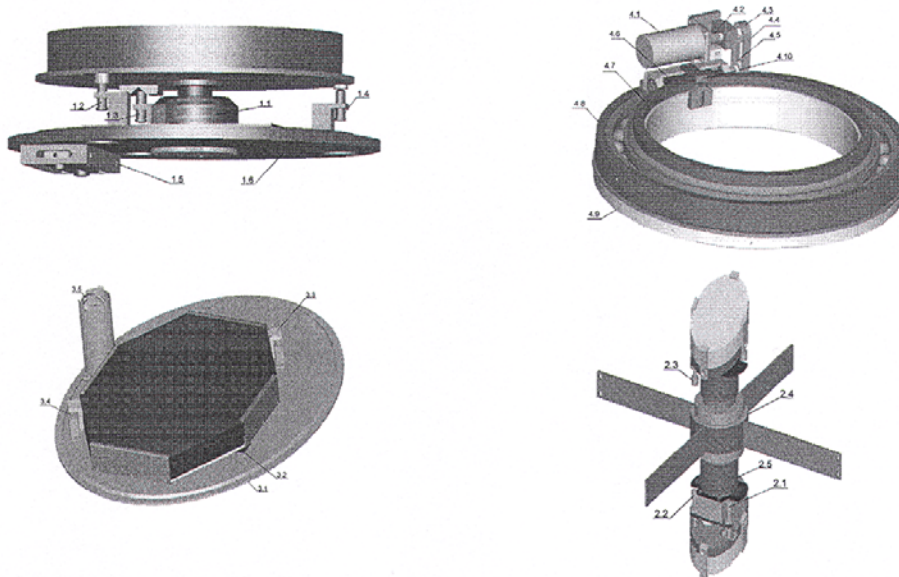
Pictures of the key particulars of the telescope. Round mirror mount. 1.1: spring; 1.2-5: fine adjustment screws; 1.6 : screws. Elliptical mirror mount. 2.1-3: fine adjustment screws; 2.4: holder; 2.5 barrel. Octagonal mirror mount. 3.1: flange; 3.2-4: fine adjustment screws; 3.5: spring. Rotary actuator. 4.1: stepper motor; 4.2: joint; 4.3: gear wheel; 4.4: timing belt 4.5: gear wheel; 4.6: tangent screw; 4.7: gear wheel; 4.8-9: flange; 4.10: switch.
